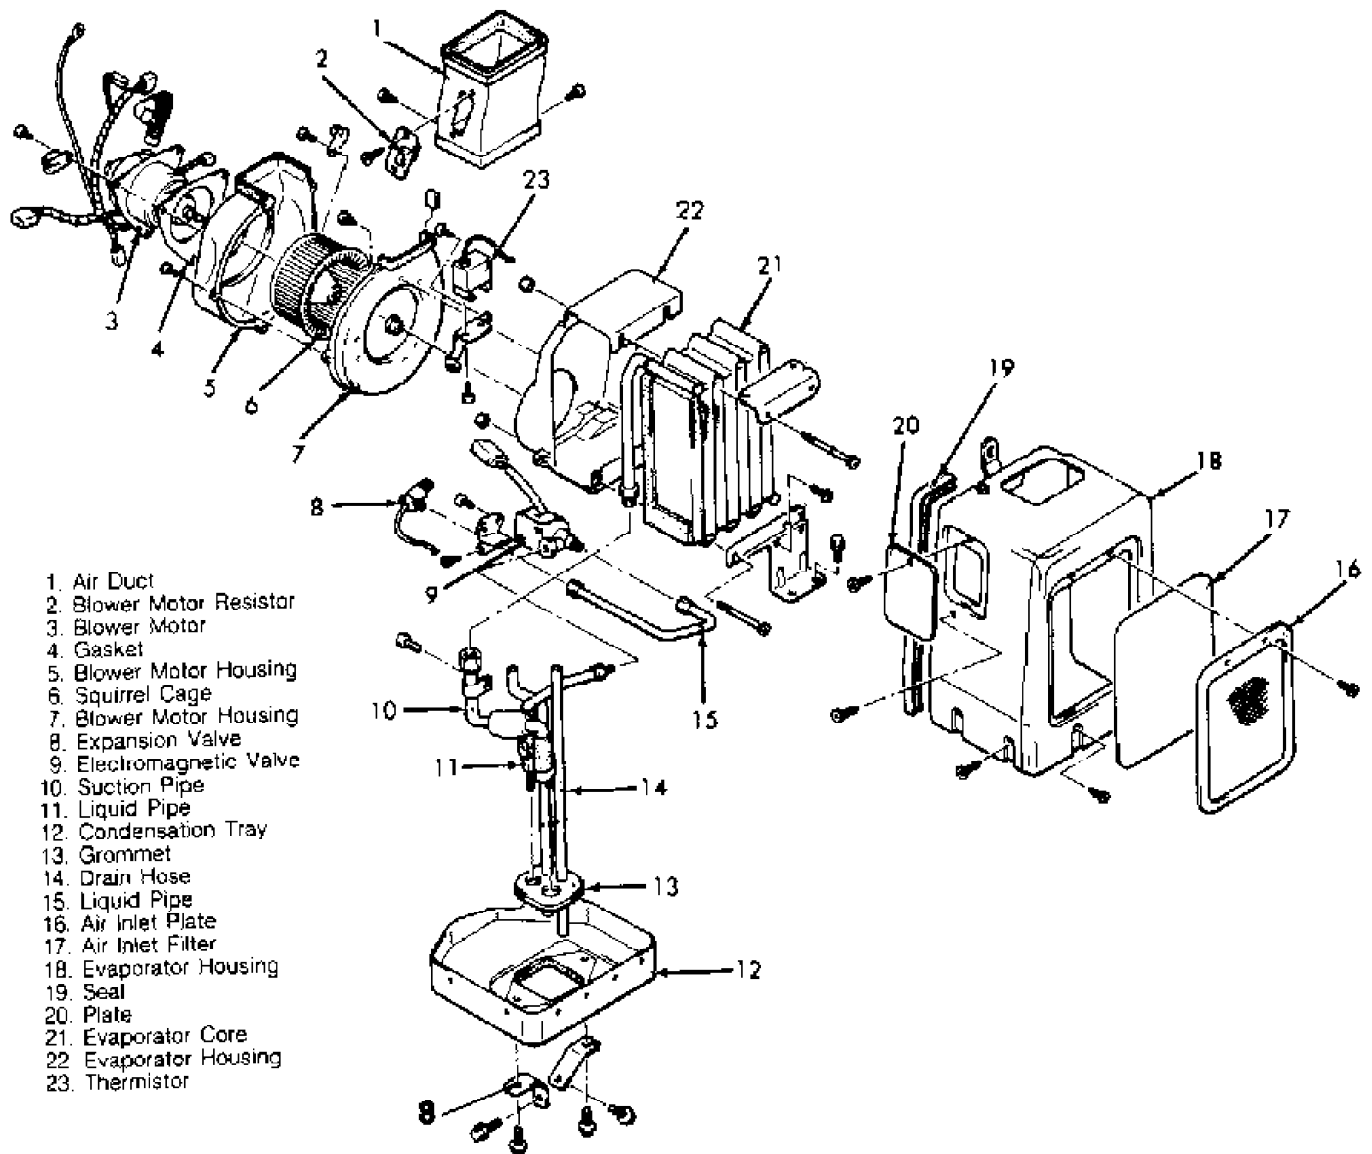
Exploded View of Rear Evaporator Assembly (Montero)
